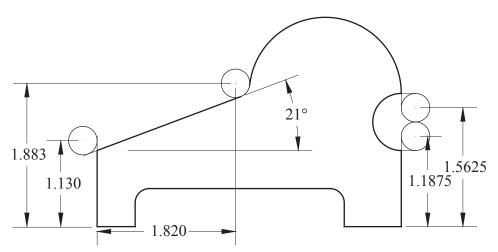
CNC Machining Center Programming Exercise 4-5, Cutter Location Coordinates
